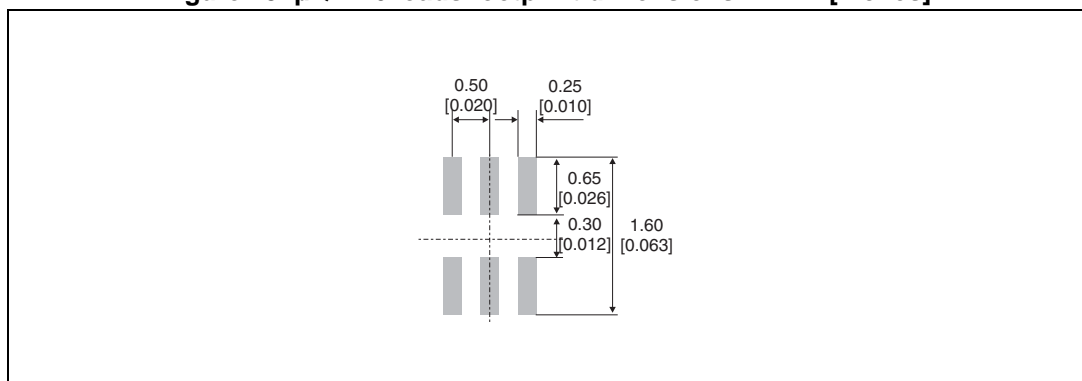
μQFN 6 leads footprint dimensions in mm [inches]
